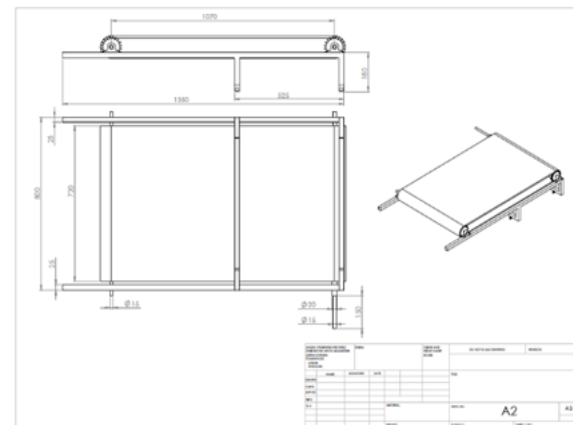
CATIA Design of Garbage Removal Machine (Conveyor Belt) from Water Surfaces in 2-D
